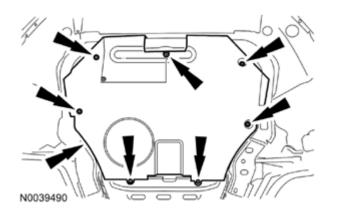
Locating Underbody Cover And Screws Courtesy of FORD MOTOR CO.
